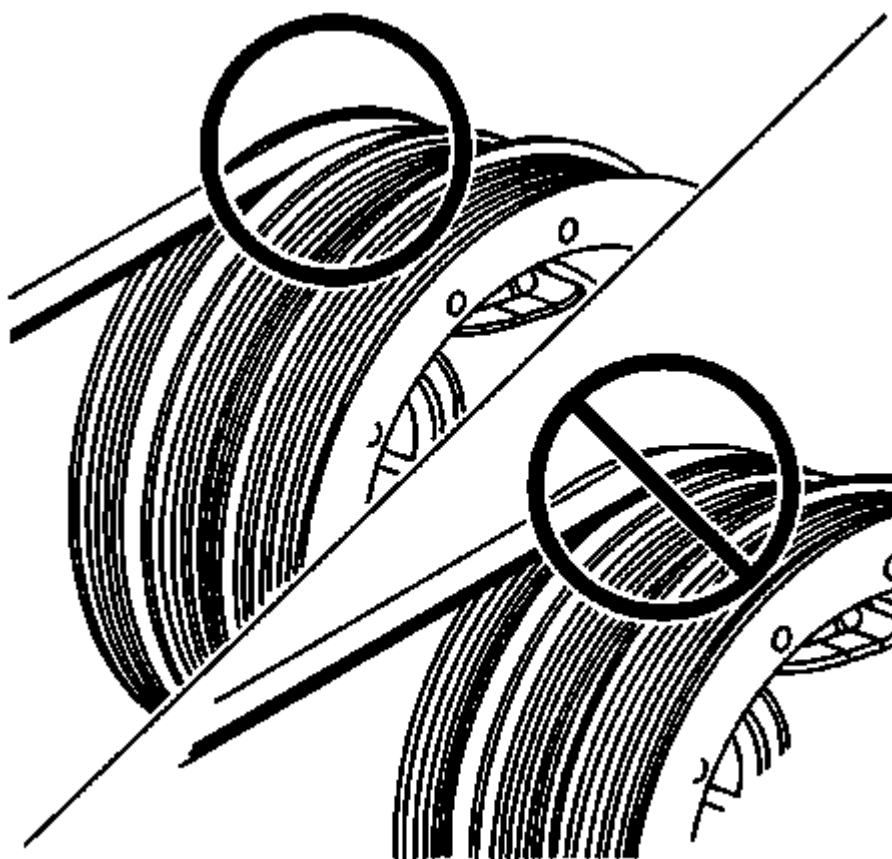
Positioning Belt On Rear Of Crankshaft Pulley
